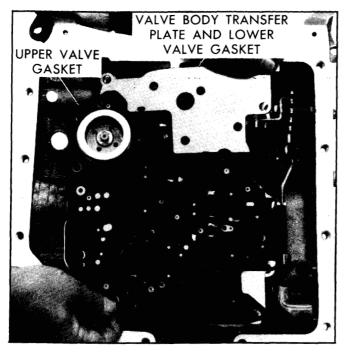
Removing Valve Body Transfer Plate and Gasket
